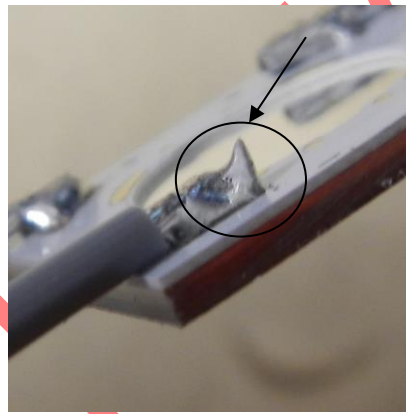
Icicle due to excess solder and slow tip withdrawal
